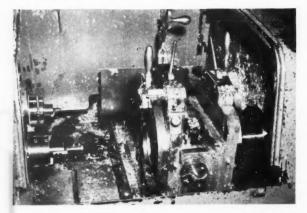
View from front of Heald Double End Bore-Matic showing tooling at left.
